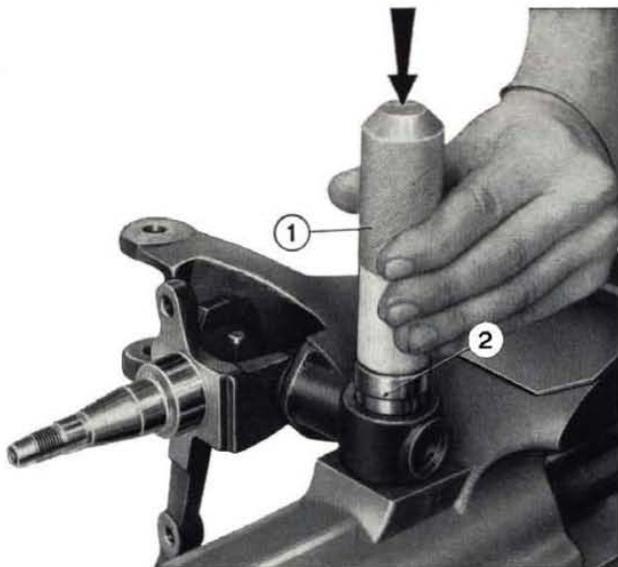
Inserting « estendblock » bushing in kingpin housing upper eye.
